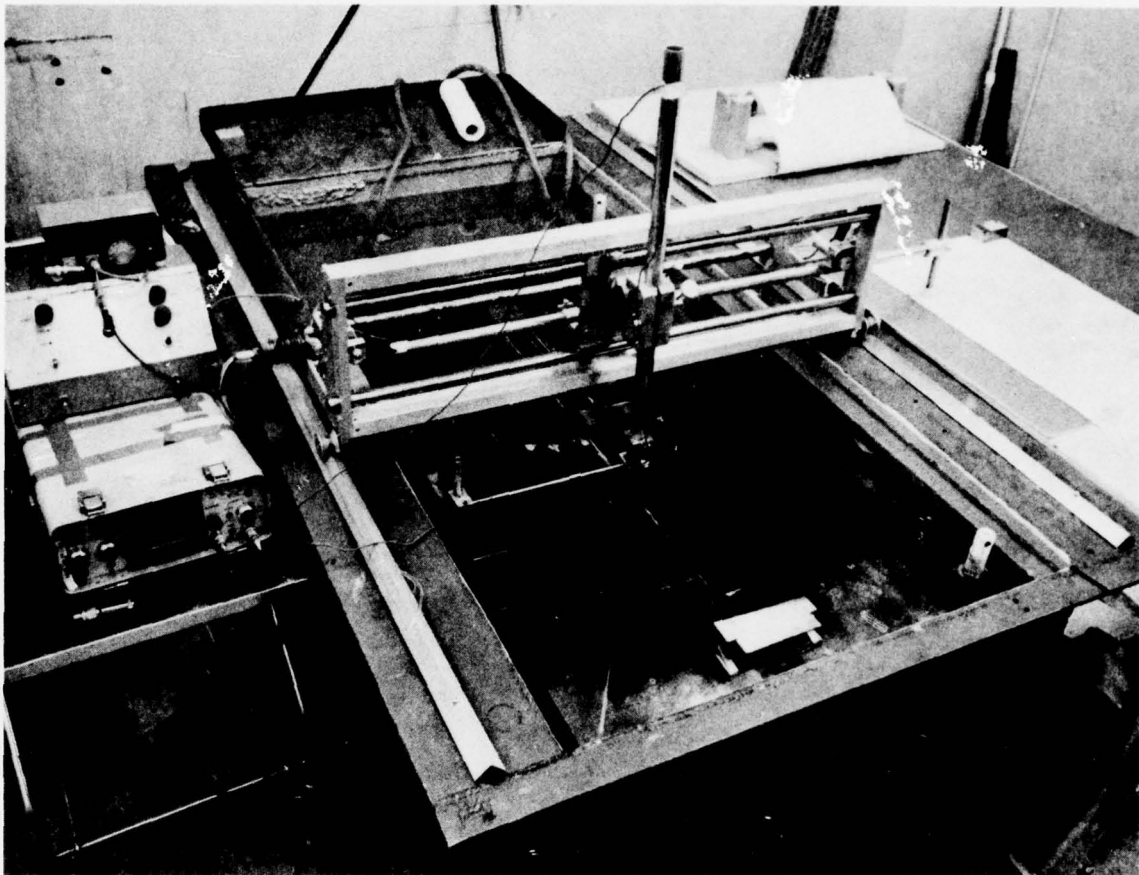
Left Skin in Ultrasonic Inspection Tank
